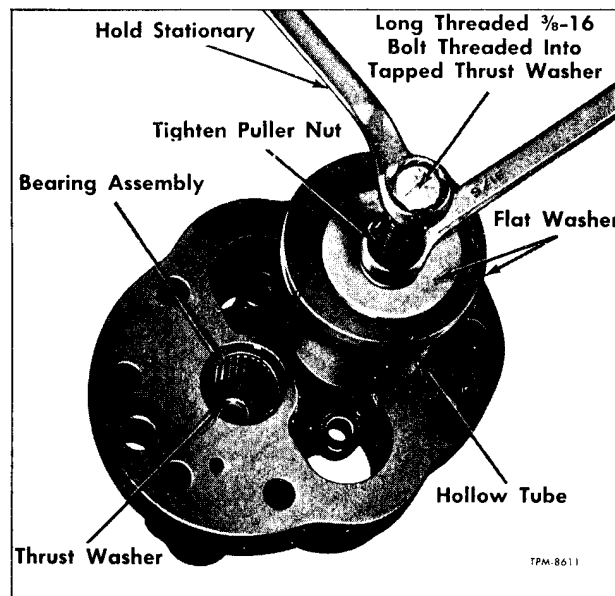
Method of Pulling Thrust Washer and Shaft Bushing
